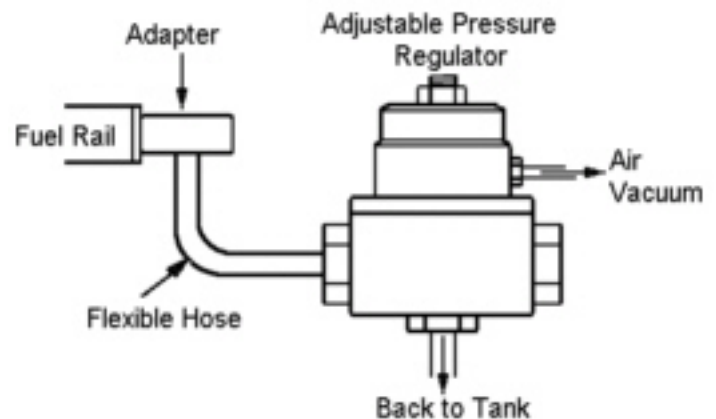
Schematic of adjustable pressure regulator and fuel rail adapter to replace stock fuel pressure regulator.
